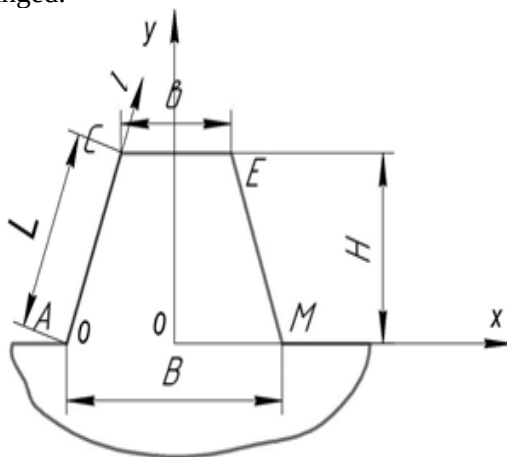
Typical shape parameters of an element formed by the rolling stamping method
